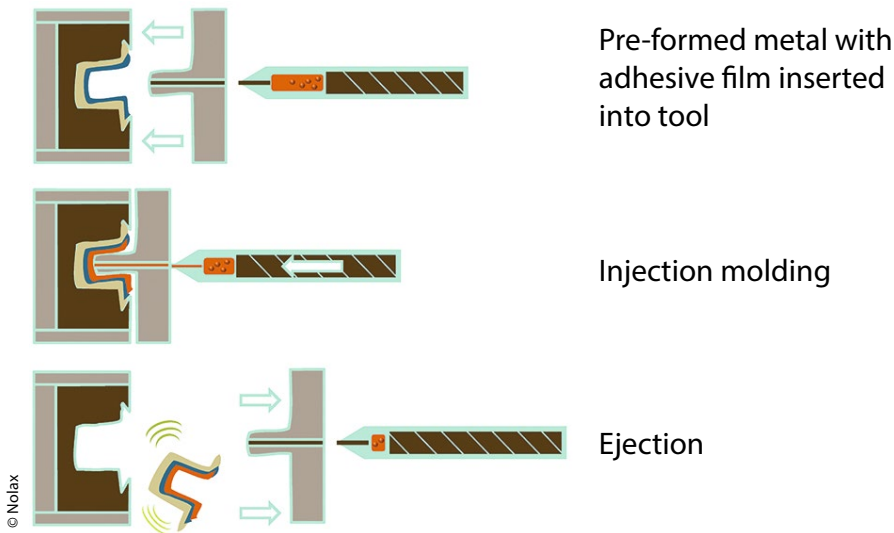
> In injection molding, the hybrid component is produced in a single step.
